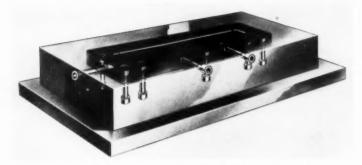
Draw and blanking dies for irregular sections may be readily produced by making the carbide inserts in sections and attaching them with screws or studs as shown here. Machineable inserts are imbedded in the carbide before delivery to die manufacturer. Die manufacturer then drills and taps these inserts.
